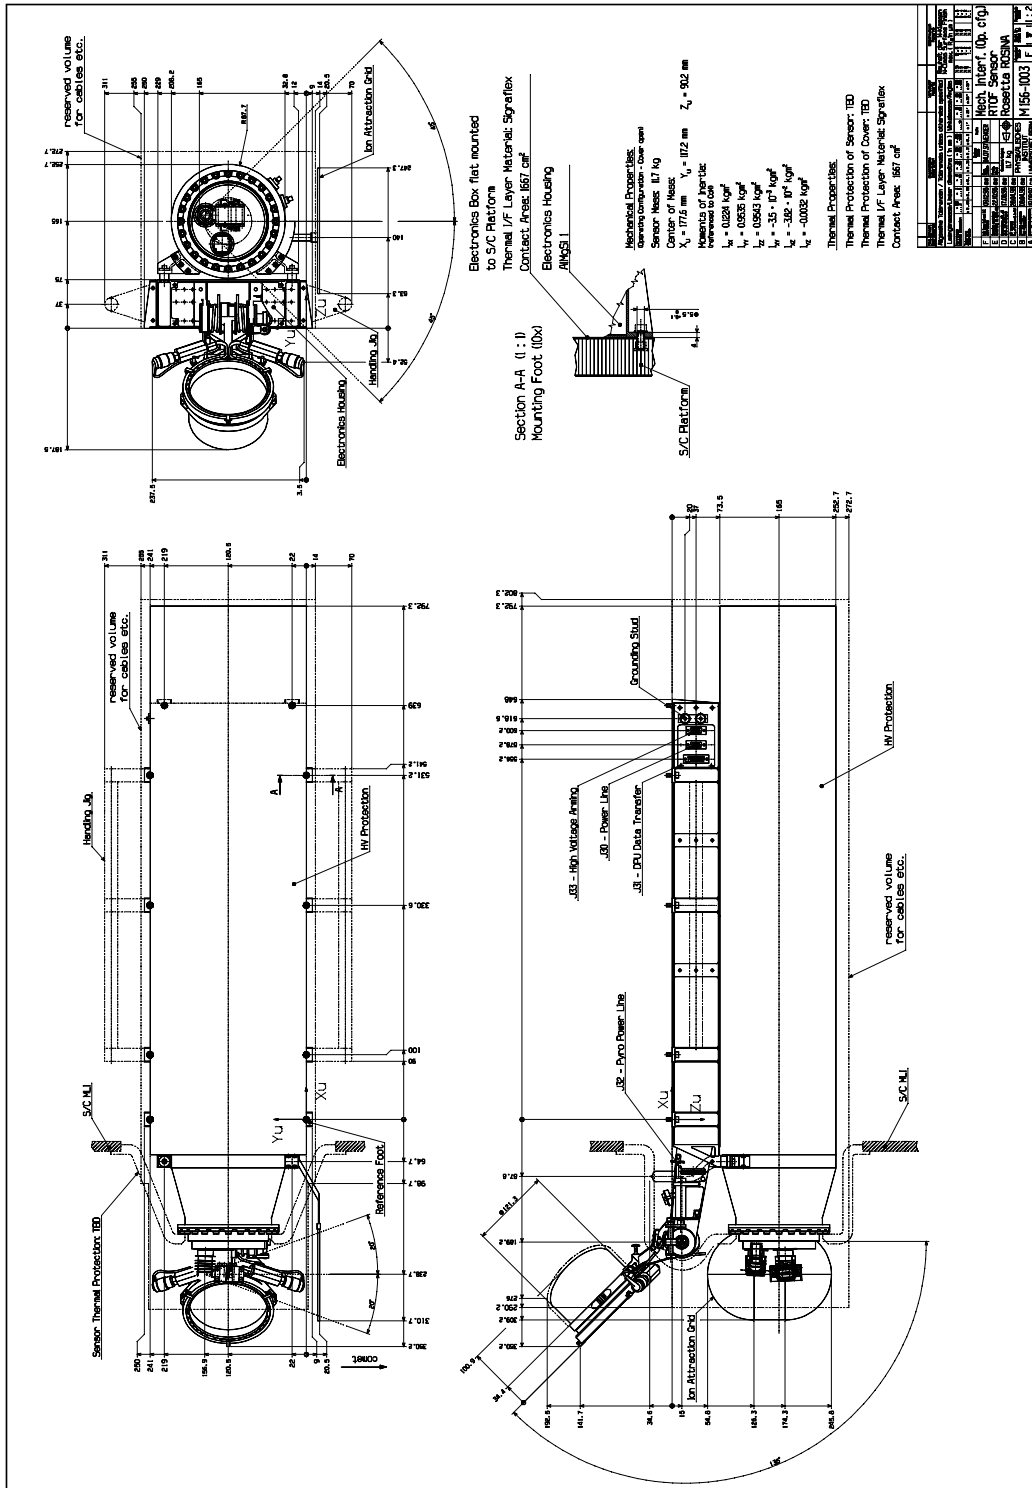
Mechanical Interface Drawing of RTOF in Operating Configuration (UoB Drawing M156-1003)
